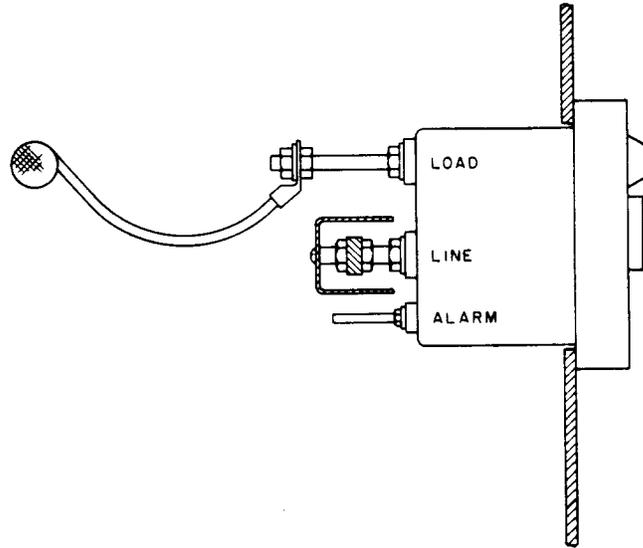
Fuse Blocks — KS-14170 and Similar Types — Wires Larger than No. 14 Gauge
